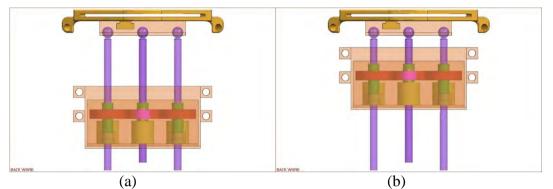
Illustration of the translation movement. Image (a) is the device at its initial zero point. Image (b) is after a 17 mm depth resection (15 mm with the tolerance of 2 mm).
